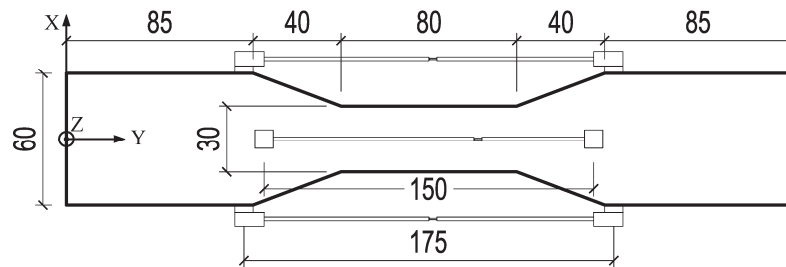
\_ Position of LVDTs in SType1 aluminum specimen (dimensions in mm)
